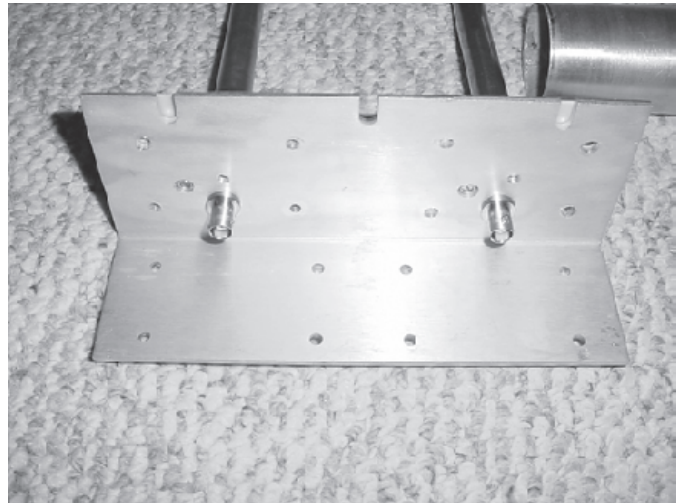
Photo B — A pair of end plate and copper pipe assemblies are attached to one piece of the aluminum angle bracket.
